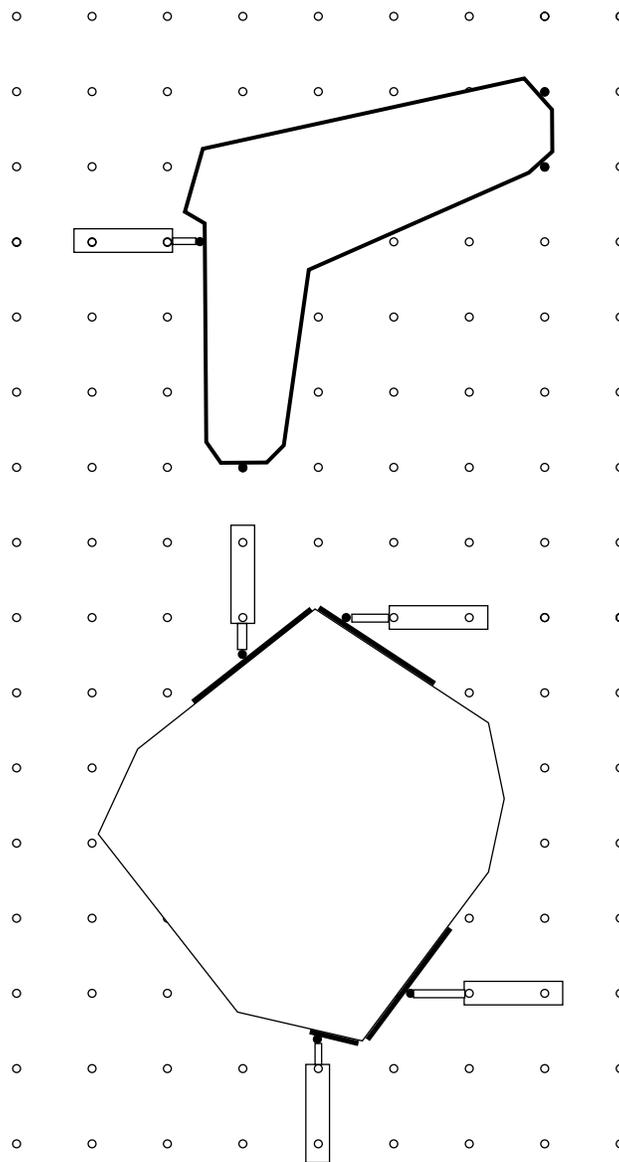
Examples of parts in modular fixtures. At top, a part fixtured with 3 locators and one clamp. At bottom, a part fixtured using 4 clamps.
